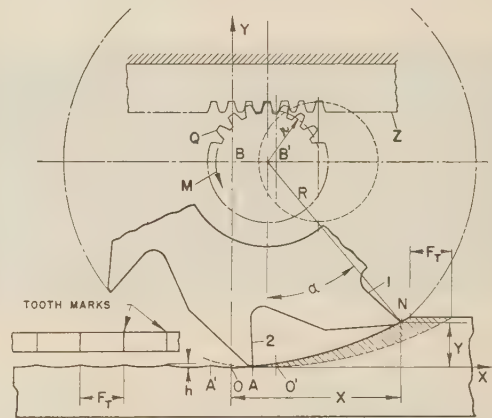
PATH GENERATED BY A MILLING-CUTTER TOOTH
